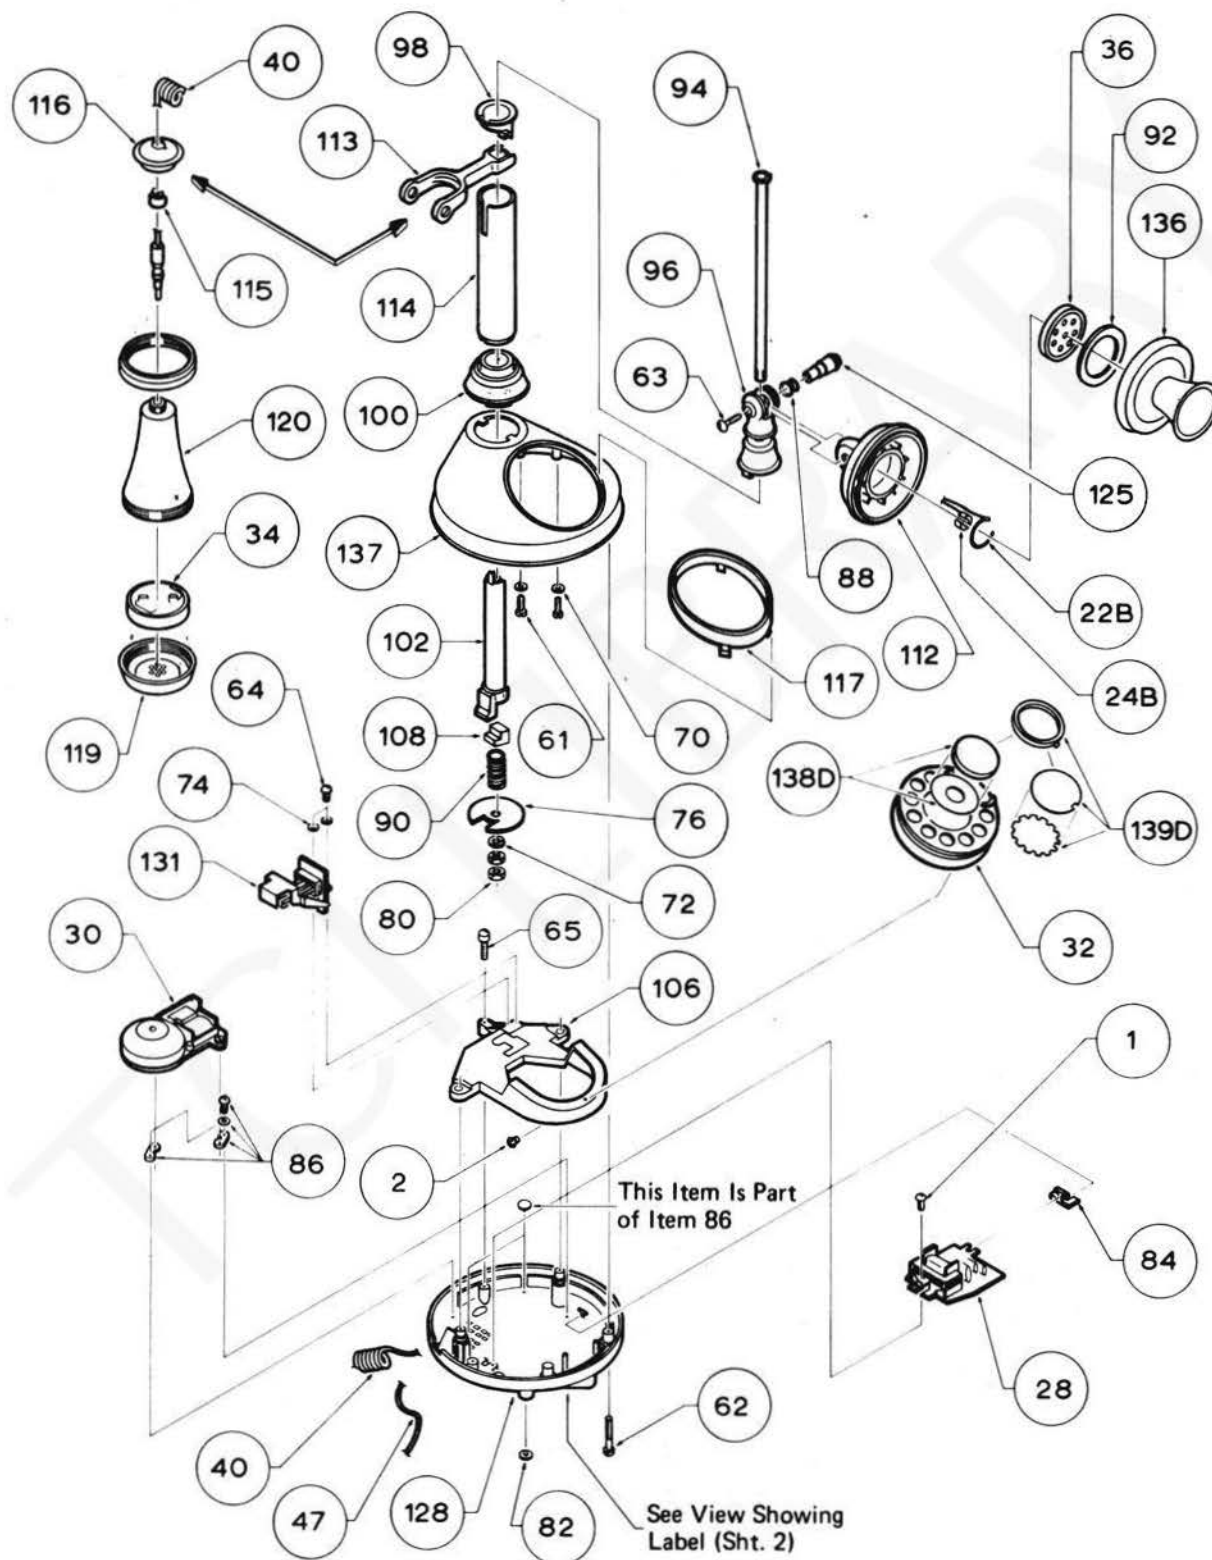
QSK420- and QSQM420-Type Telephone Set, Assembly of Parts (Table F)
